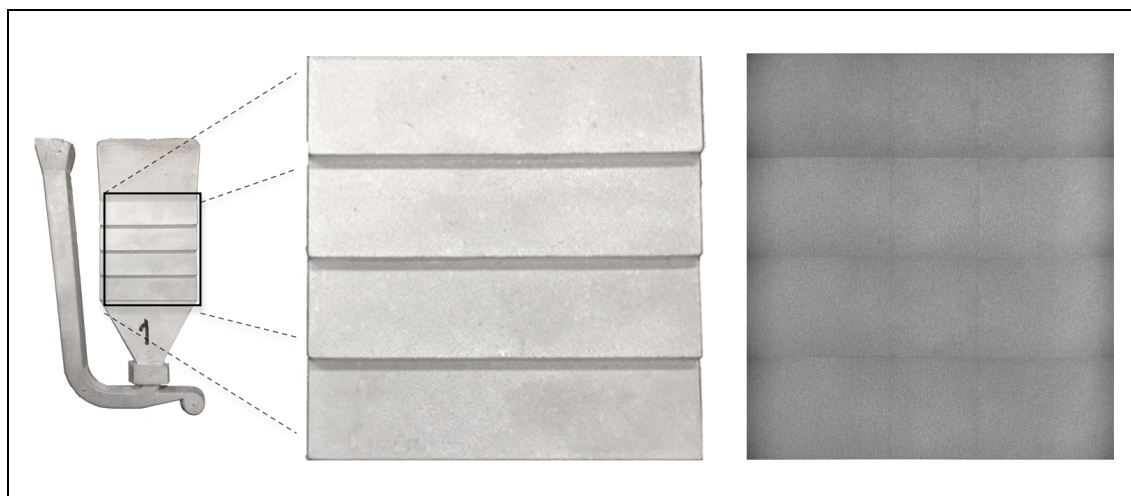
Macro-focus X-ray image of a casting produced by using the optimised mould [38]. No macro defects have been detected.
